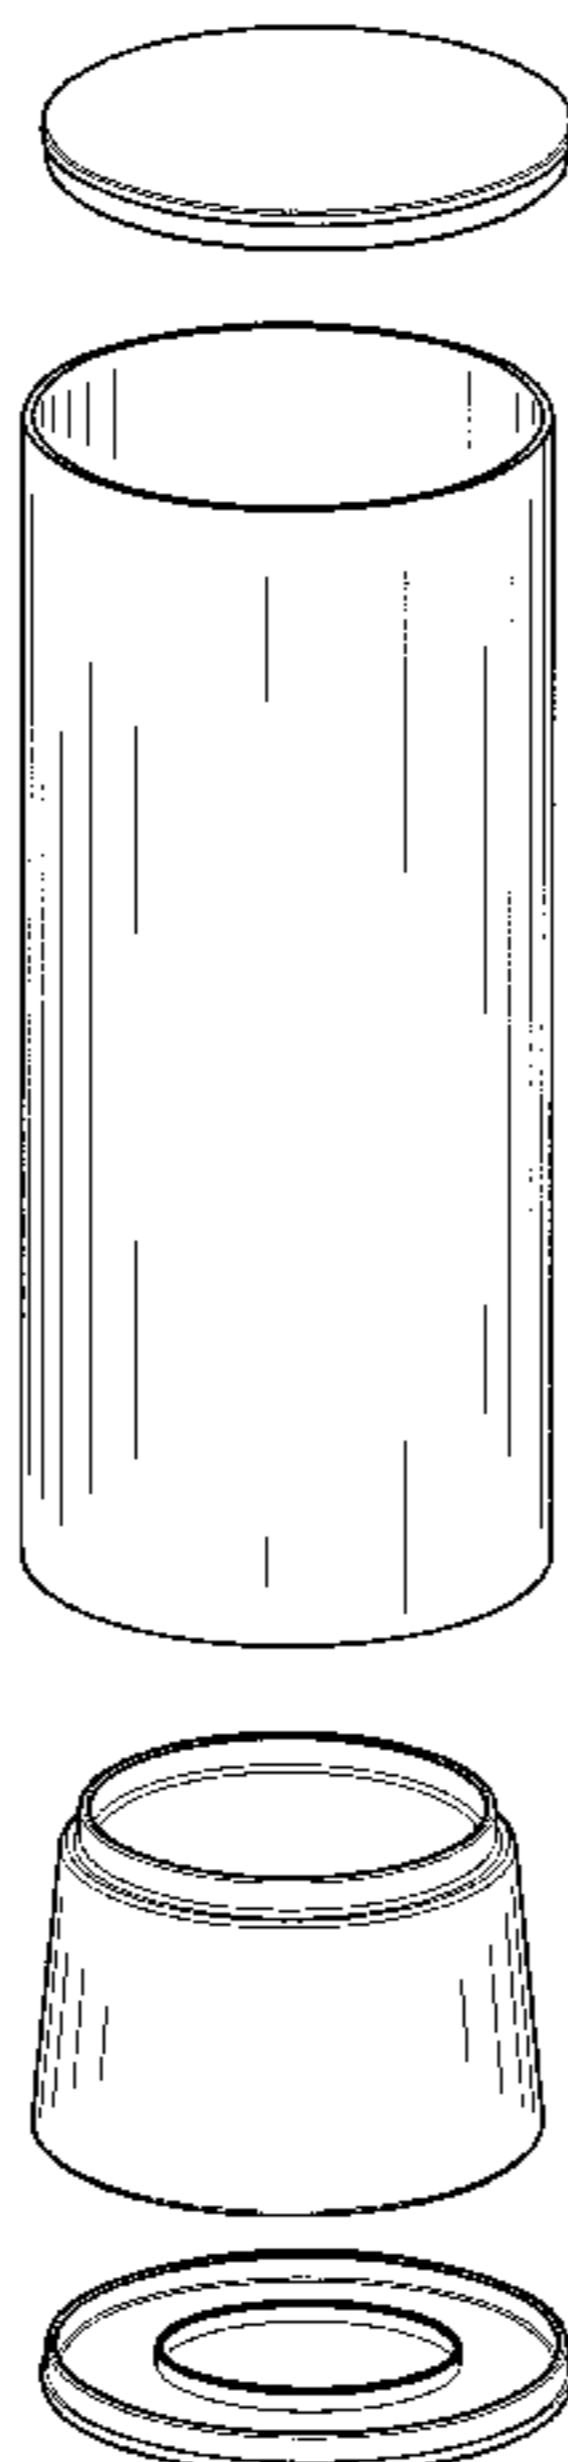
is an exploded perspective view illustrating the components of the tubular packaging of the present invention shown in FIG. 1;
